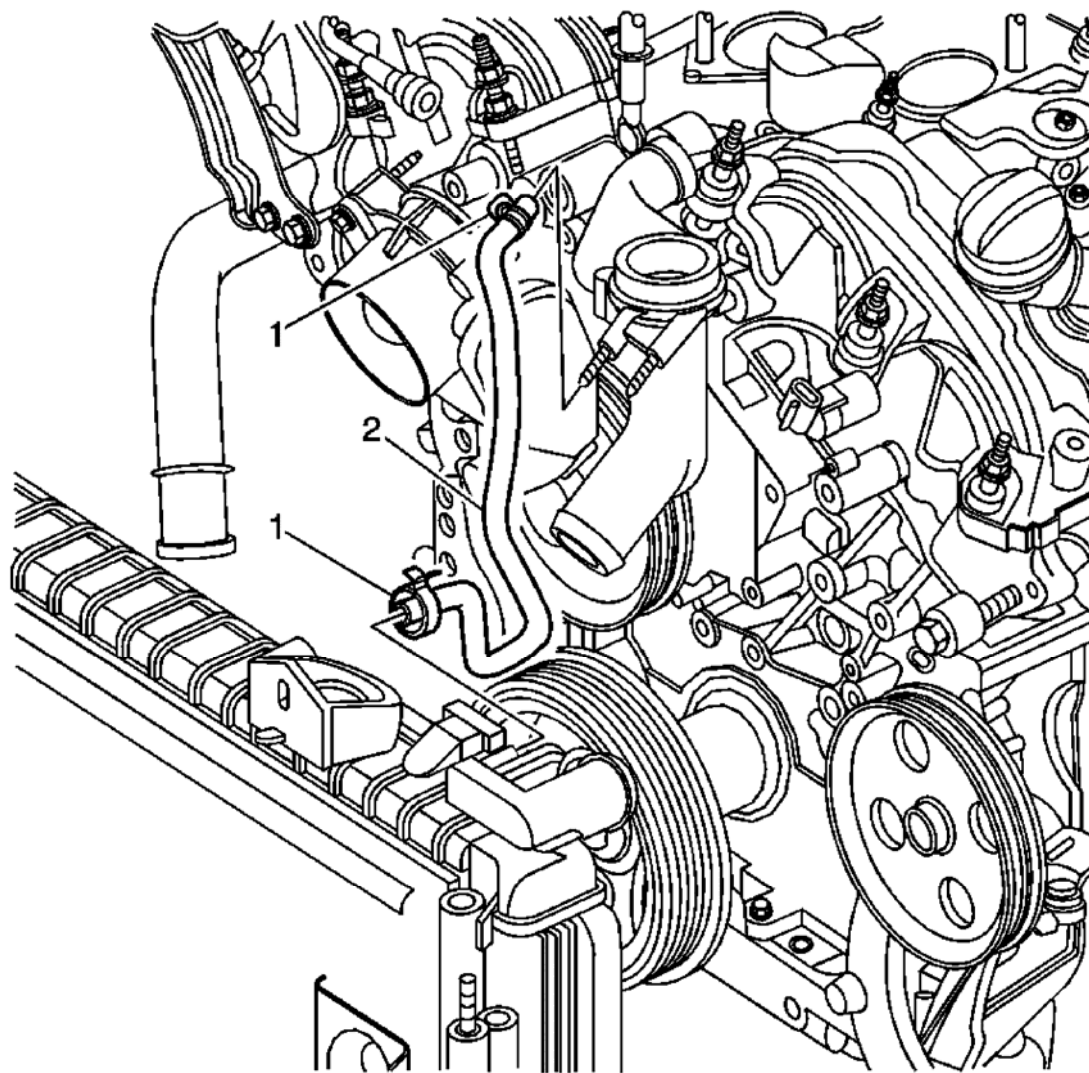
Engine Coolant Air Bleed Hose (LLT)
